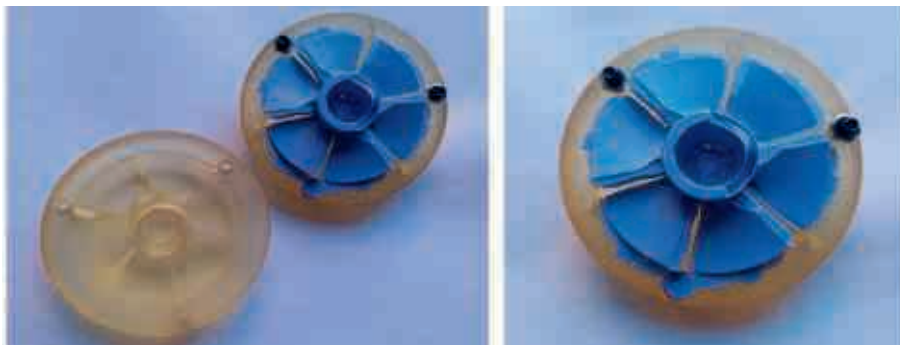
High temperature-resin mold after demolding polyethylene propeller.
